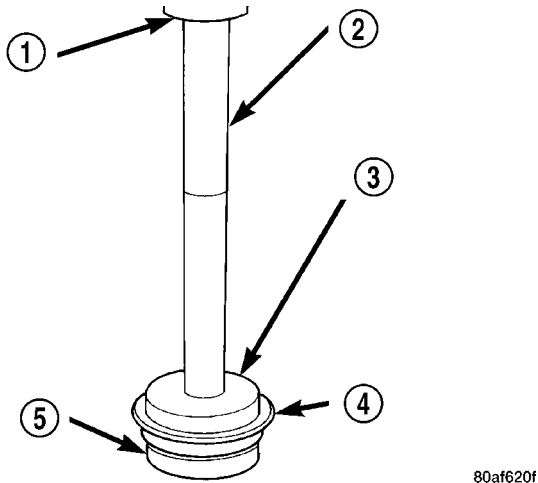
Install Transfer Shaft Bearing Cup Into Retainer
